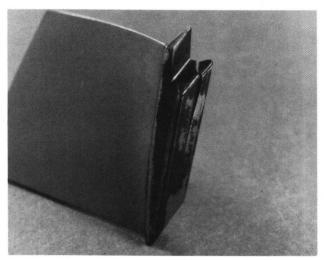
Crack in Blade/Dovetail of 1st Stage LP Compressor
